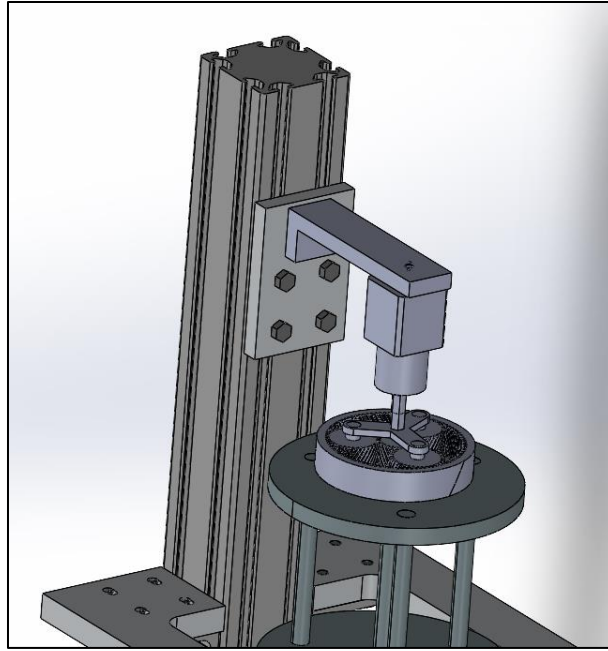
Planetary gearbox w/ NEMA-17 motor concept model
